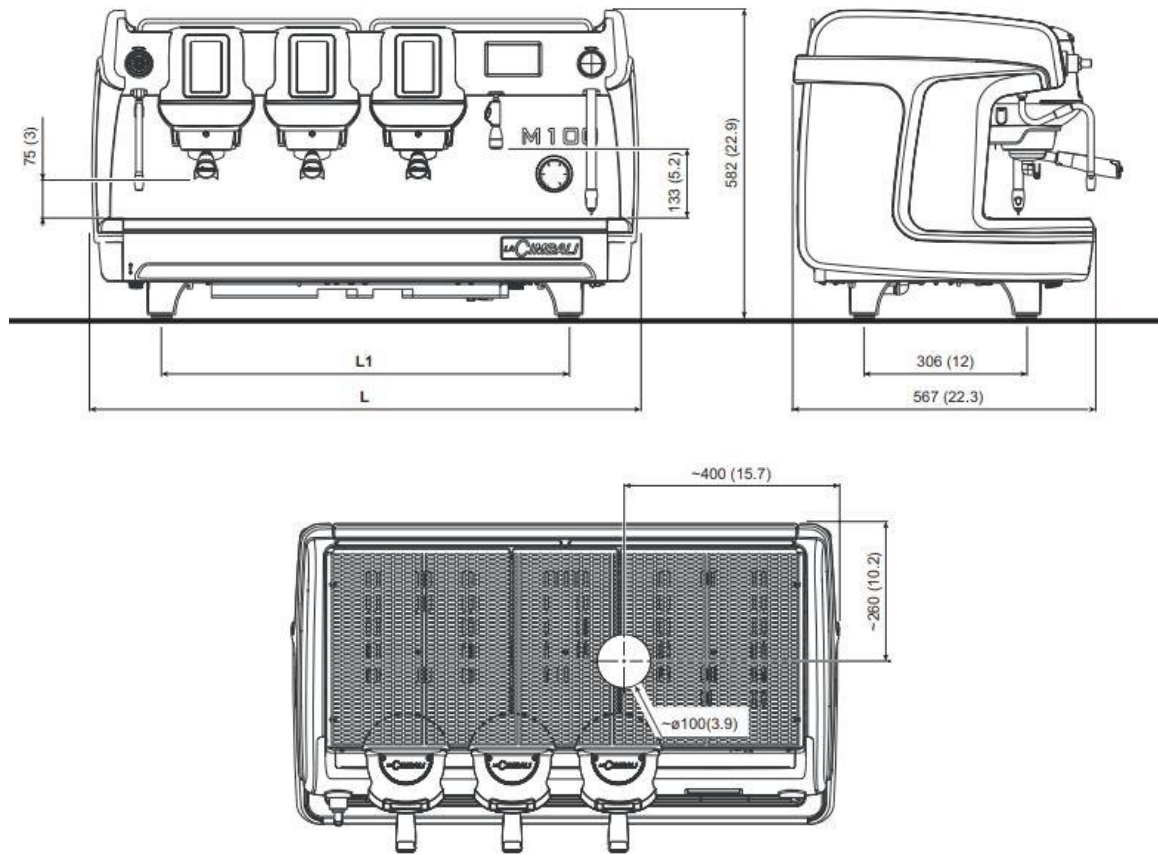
Drawings with dimensions of the coffee machine M100 GT Attiva manufactured by Cimbali [41].
